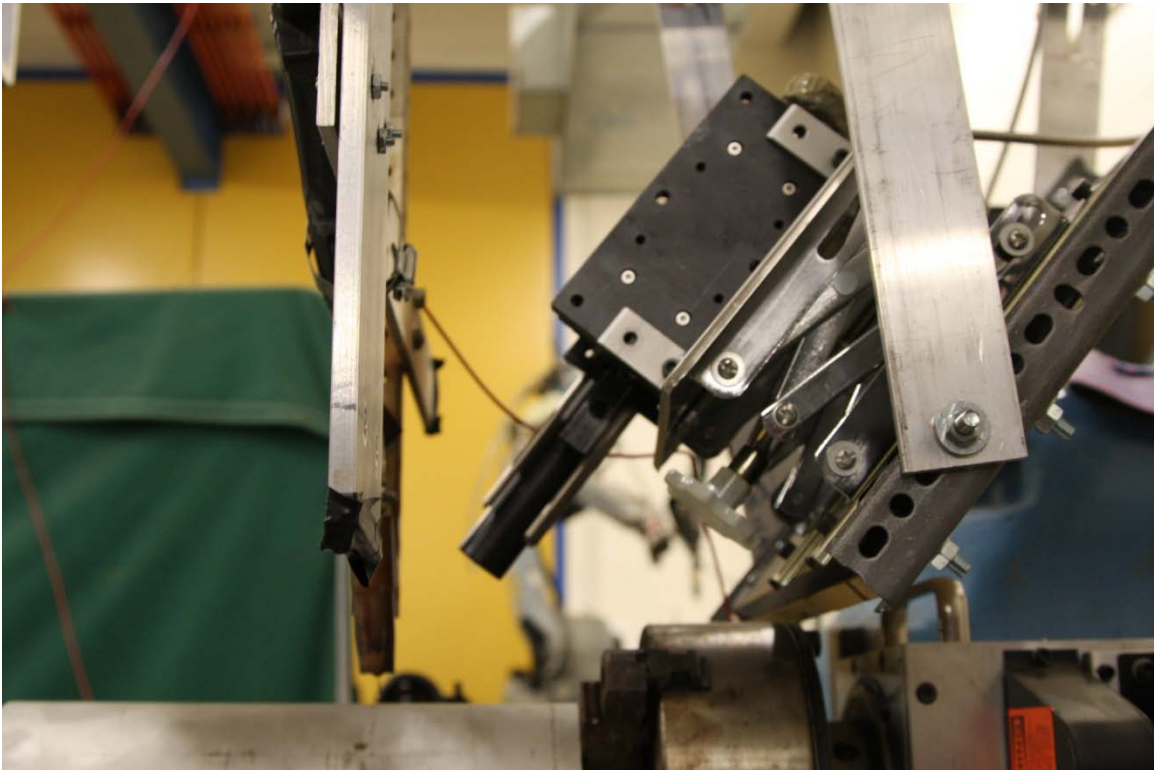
Laser and its installation in relation to the welding torch
